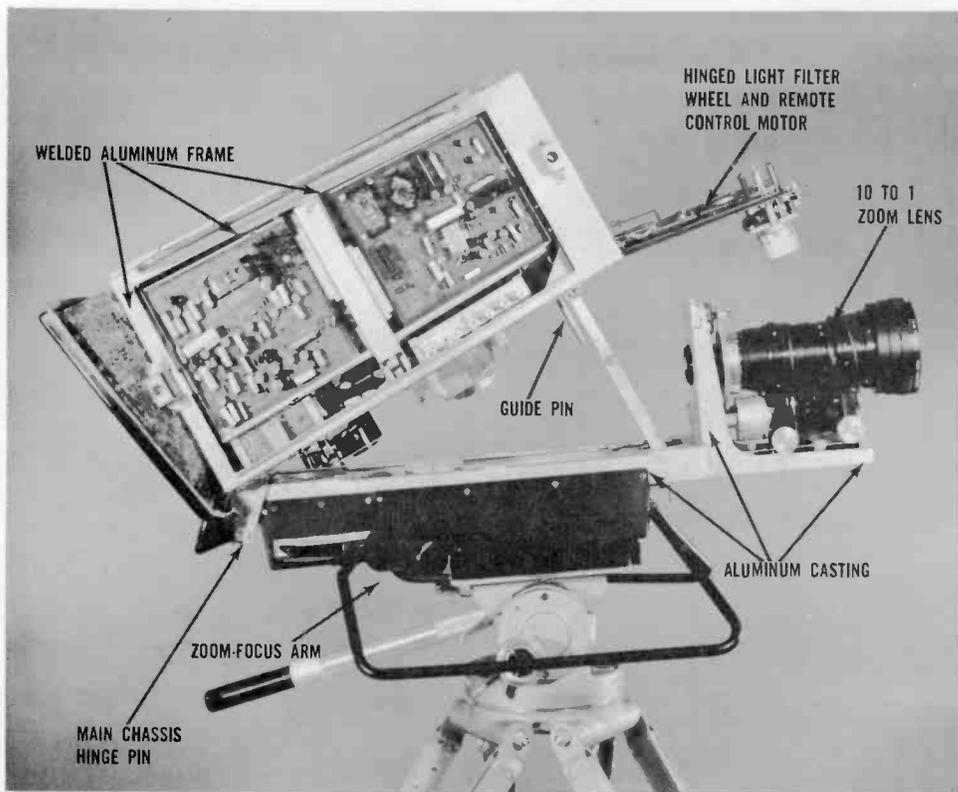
SIDE VIEW, MAIN CHASSIS RAISED
